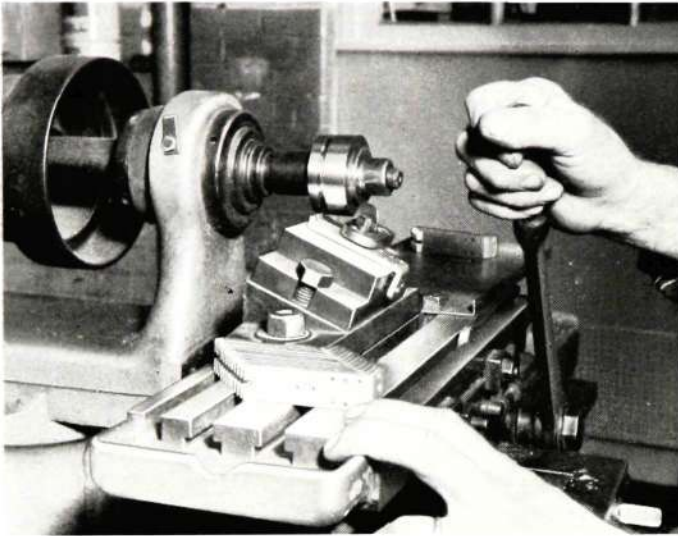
Minor damage to the knife edges, sustained during handling, is rapidly removed by rollings, with this set-up on an obsolete milling machine
